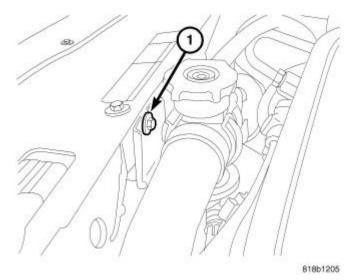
Upper Radiator Hose Support Courtesy of CHRYSLER GROUP, LLC
